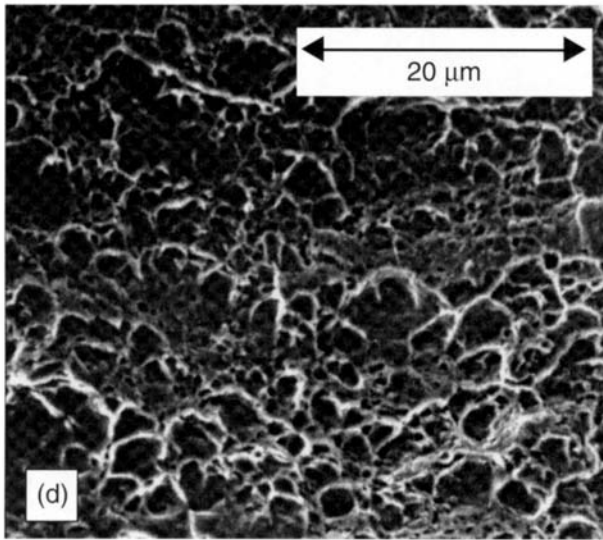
(continued) Typical fracture surfaces of the welds exposed to the NACE solution at various H_2S saturation levels (d) Ductile Zone.
